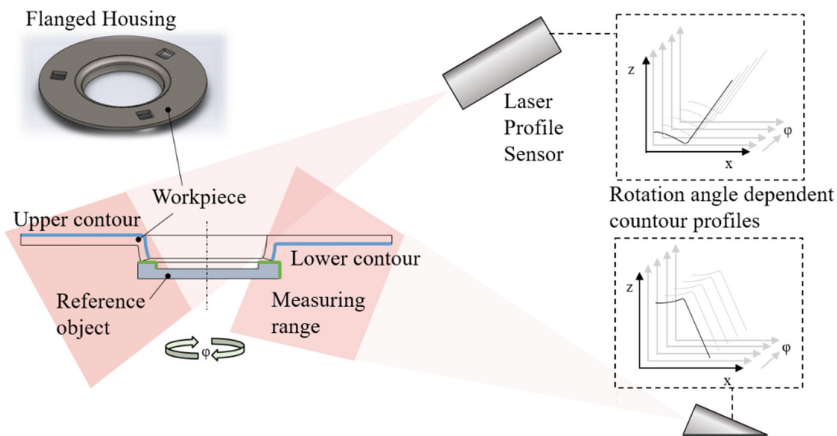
Measurement of workpiece geometry with two laser profile sensors
